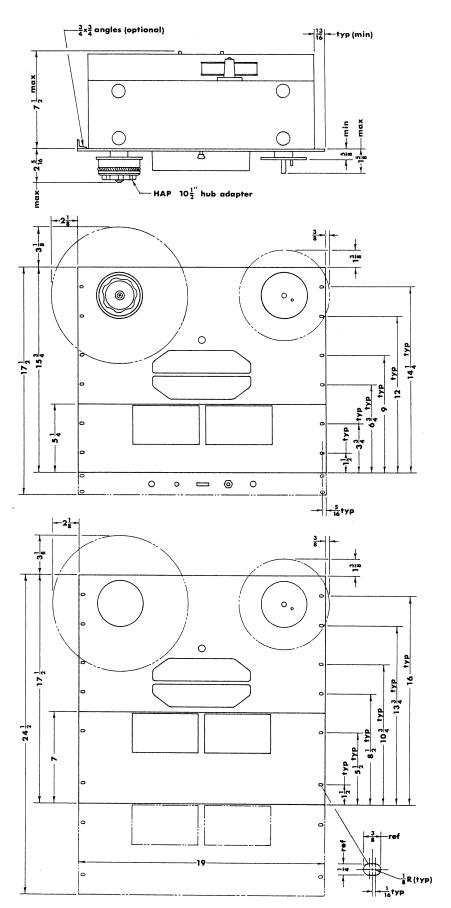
MOUNTING DIMENSIONS (RECORDERS)
